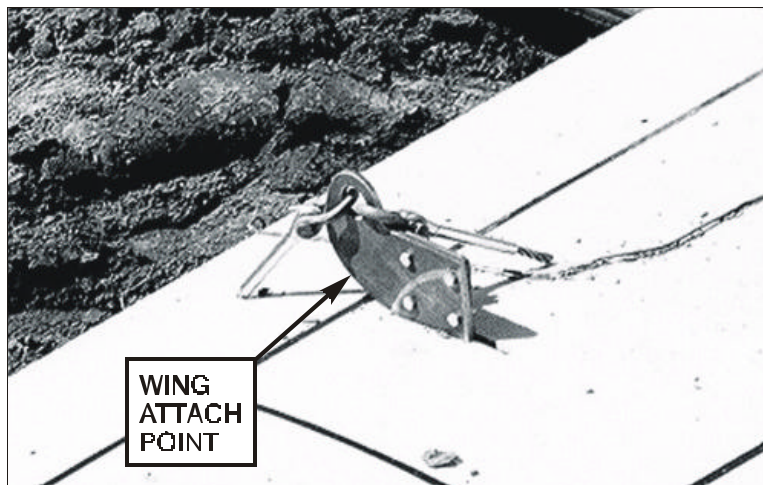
Close-Up View of Wing Cable Mounting Bracket
